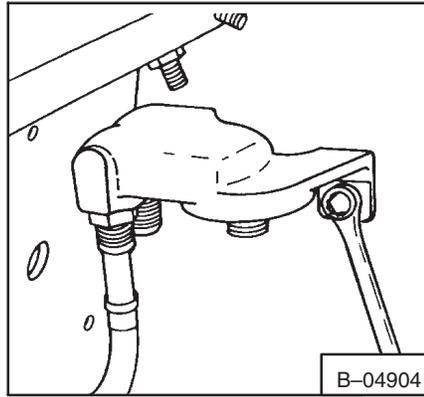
Removing The Oil Cooler (642 & 643)
